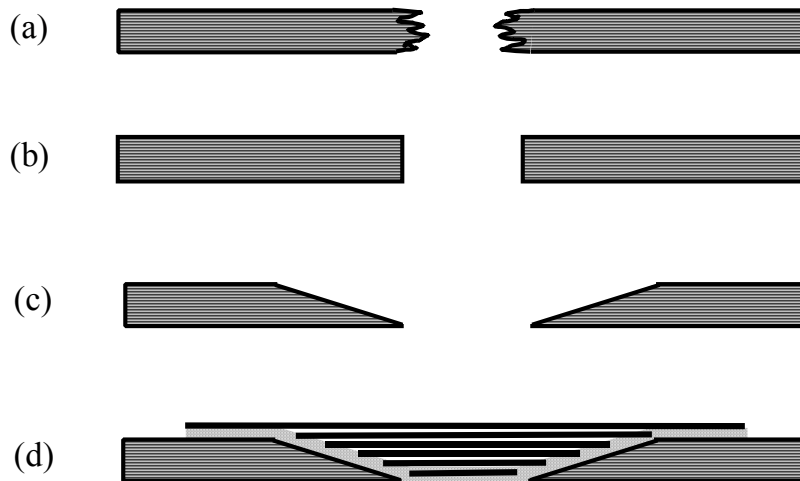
Plate Cross Section: Steps for Scarf Joint Repair: (a) damaged plate, (b) damage removed, (c) tapered edges of damage cutout, (d) tapered repair with adhesive and overply.
